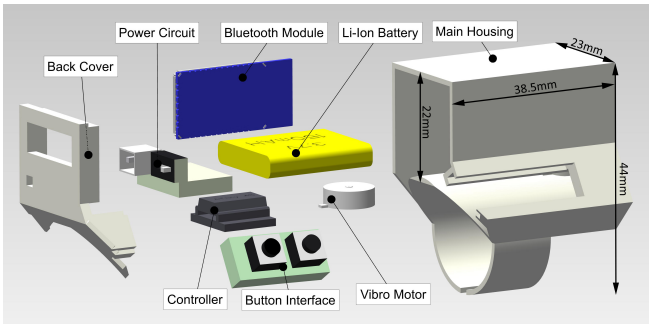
CAD exploded view of the remote ring interface for the Co-Gripper.
